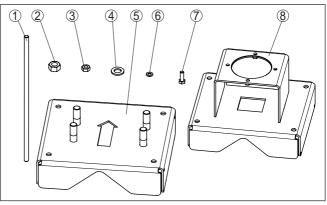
Mounting bracket for pipes irradiated at right angles KV 31 - horizontal sensor mounting
